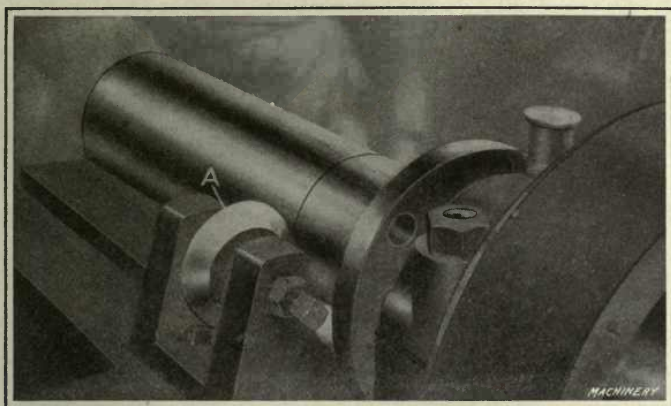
Close View of Cartridge Case Trimming Machine shown in Fig. 150
